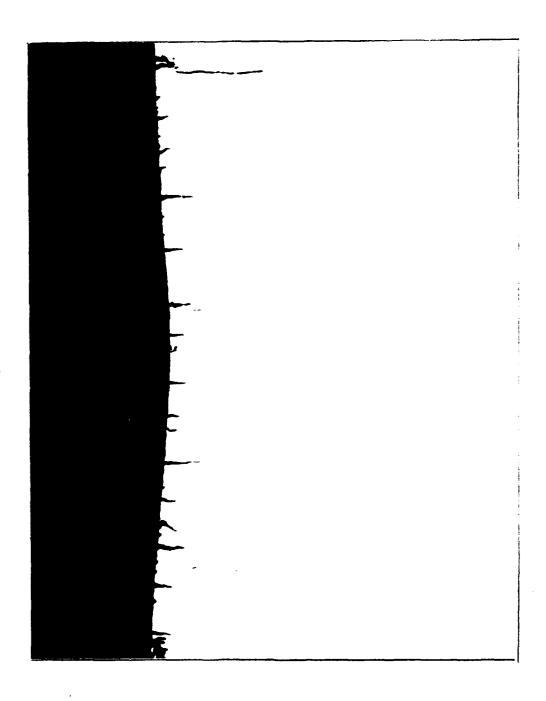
Transverse section of Figure 1 showing the uniform array of heat checks and fatigue cracks initiating from the heat checks, 15X.
